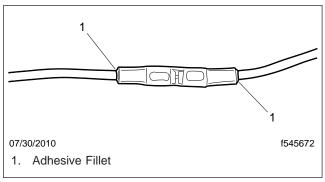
, Heated Solder Sleeve with Solder Band Melted into the Splice
